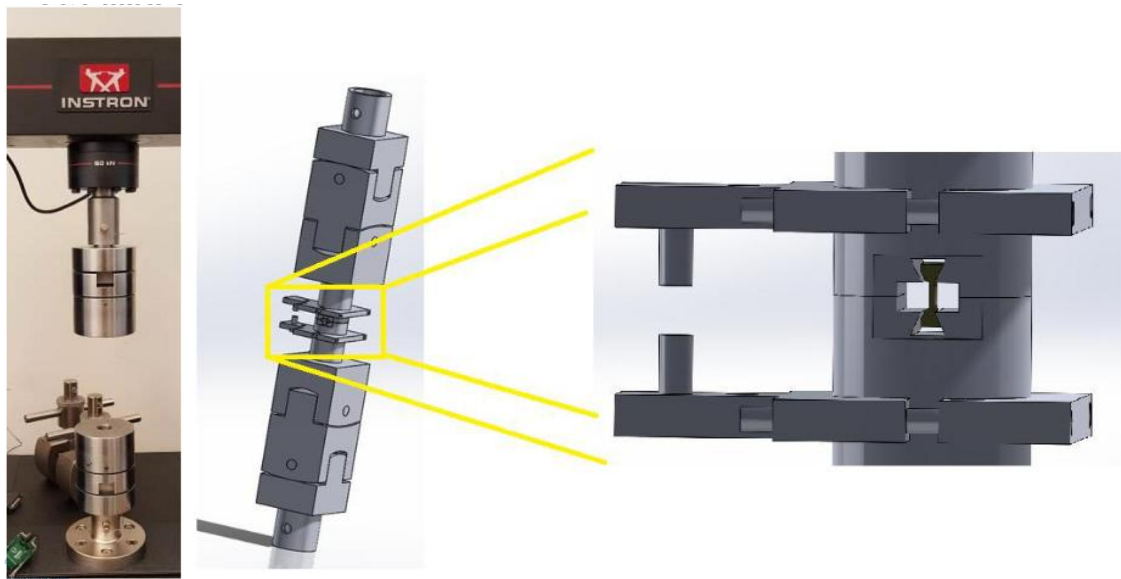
Setup showing the self-aligning grips on the INSTRON testing machine. Also, a CAD representation of assembly of the self-aligning grips and expanded view of grips of the MT2 specimens. The extensions on the MT2 grips represent the extensometer.
